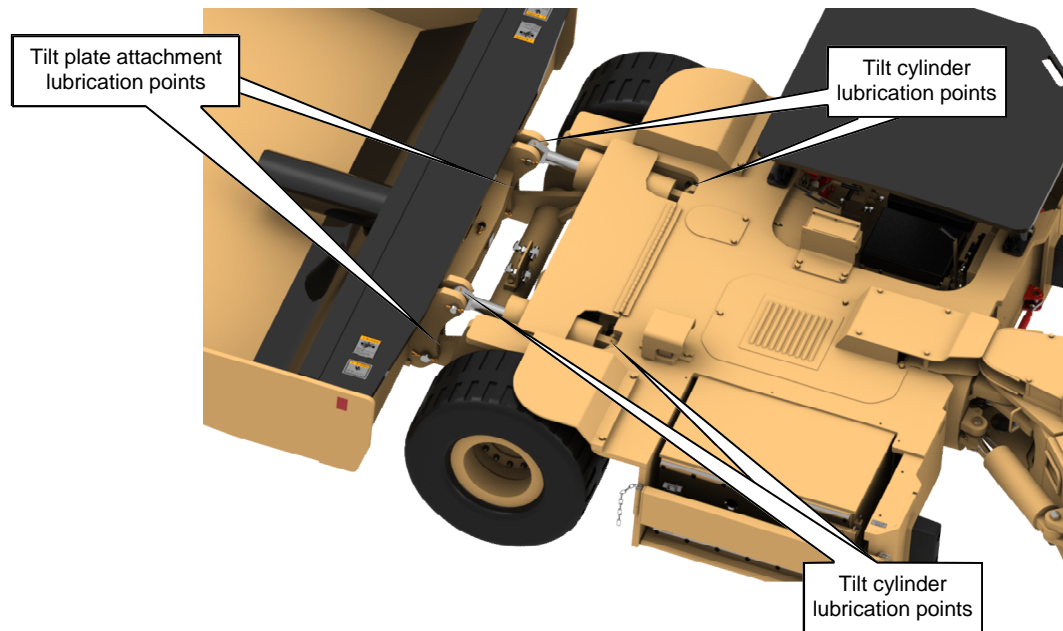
Oscillating bearing lubrication pointstilt cylinders
